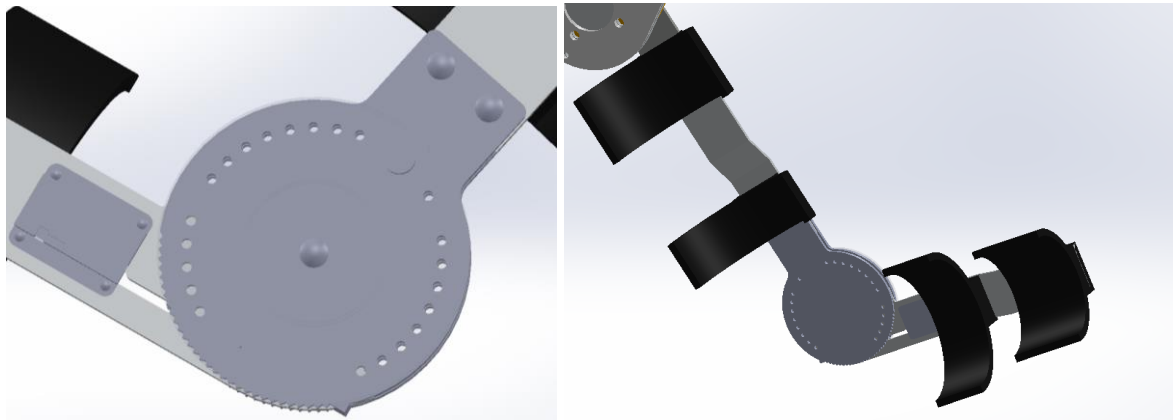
Left: Detail of the passive elbow joint with extension ratcheting mechanism. Right: Elbow joint together with arm and forearm links
